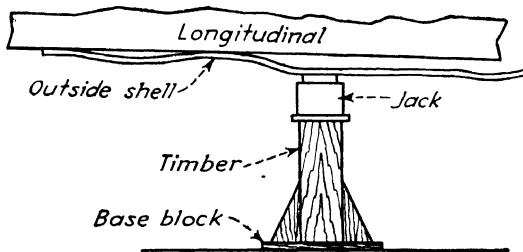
Hydraulic jack set up on timber column being used to push up bottom shell plating.
